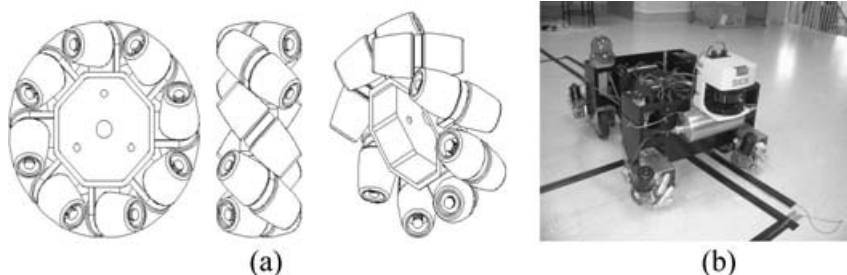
(a) Mecanum Wheel Design With Centrally Mounted Rollers, Rollers Can Rotate About Their own Axis to Reduce Friction. (b) The Developed Mobile Robot.
